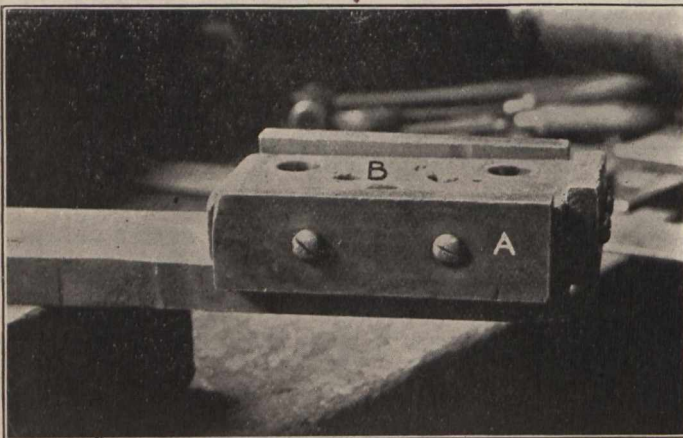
Jig for Drilling Holes in Eccentric Rod Butt.
